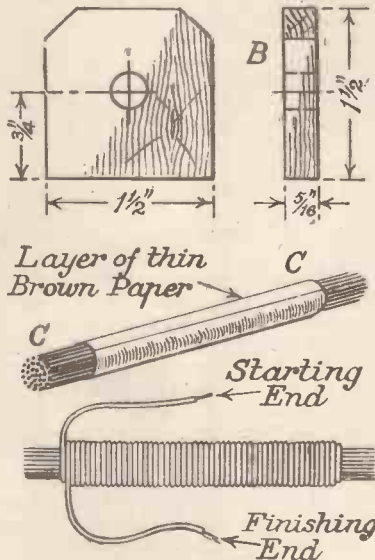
Details of coil cheeks, iron core and primary winding.
